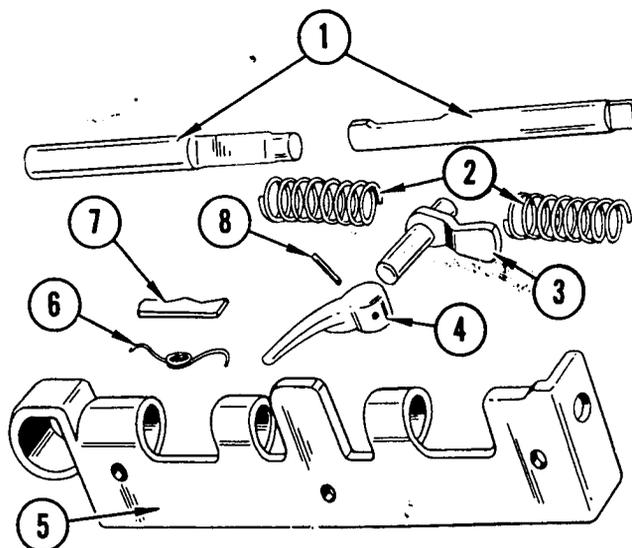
DOOR LOCK ASSEMBLY, R. H.
